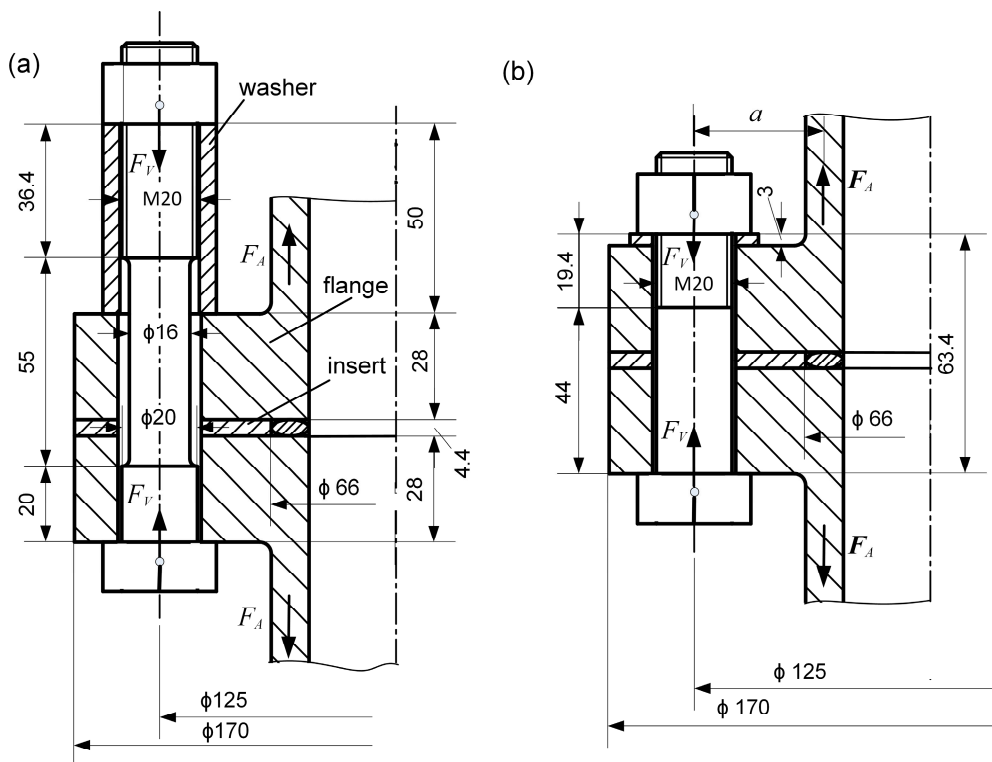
Examples of bolted flange joints: (a) example with elongated bolt and (b) example with short bolt; Adapted from ref. [27].
